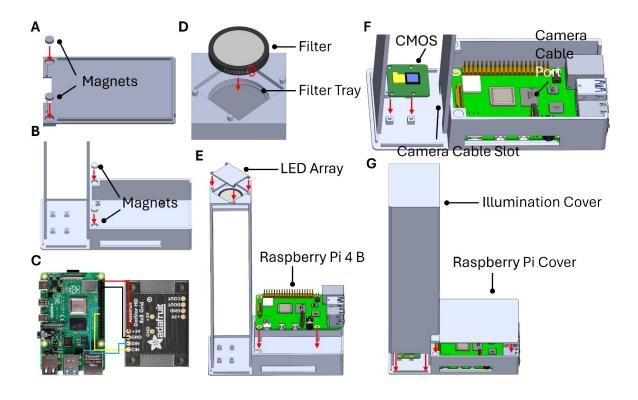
OpenLM Assembly Workflow. A–B) Insert four neodymium magnets into the Raspberry Pi cover and the platform holder—two in each part. C) Connect the LED array to the Raspberry Pi. D) Place the optical filter into the filter tray on the platform. E) Assemble the LED array and Raspberry Pi onto the platform. The small alignment pegs on the platform fit into corresponding holes on the LED array and Raspberry Pi 4B, securing their positions. F) Mount the camera module onto the platform. Alignment pegs will hold the module in place. The camera cable should pass through the designated cable slot and connect to the camera port on the Raspberry Pi. G) Attach the illumination cover and the Raspberry Pi cover to enclose and protect the illumination system.
